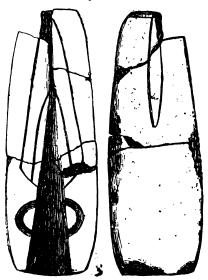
Half of mould for casting a socketed spear-head, Killymeddy, Co. Antram (\frac{1}{2}).
